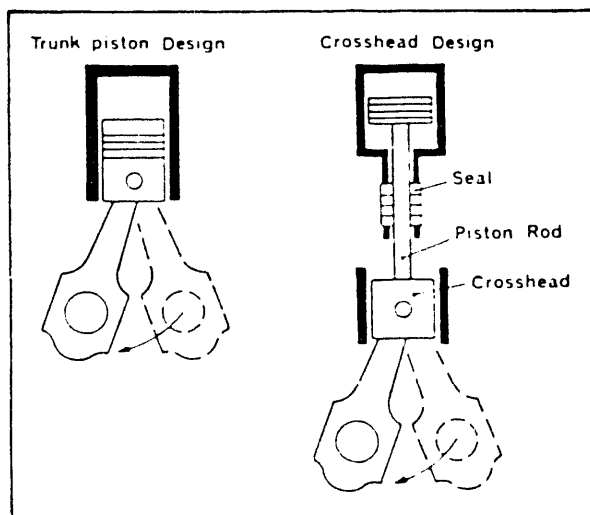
TRUNK PISTON AND CROSSHEAD DESIGN COMPRESSORS
